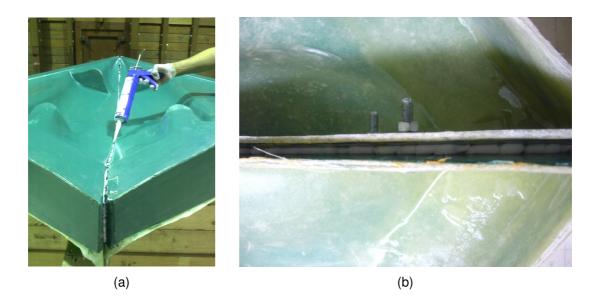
Gluing the moulds: (a) top view; (b) bottom view.
